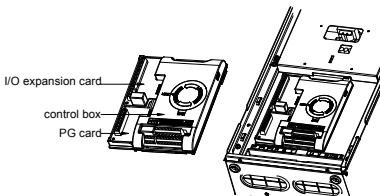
Schematic Diagram of Assembly & Disassembly of I/O Expansion
